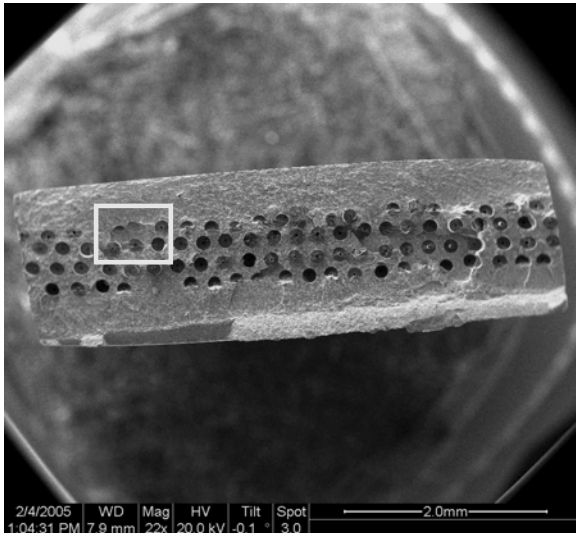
Specimen F/G-02, fracture surface (looking toward composite side)
